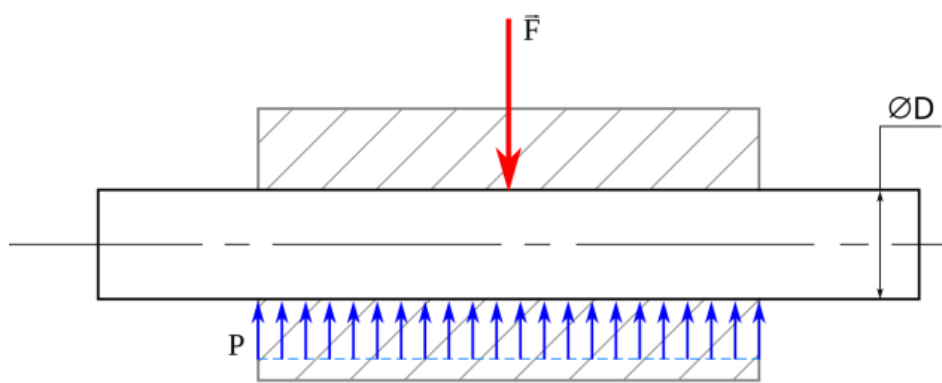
Contact configuration between the shaft (white) and the bearing (striped)
